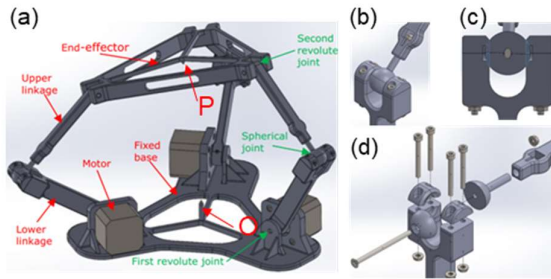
Mechanical design of the 3-RSR wrist. (a) CAD model of the 3-RSR wrist. (b) Isometric view of the spherical joint. (c) Contact surface of the spherical joint. (d) Exploded view of the spherical joint
